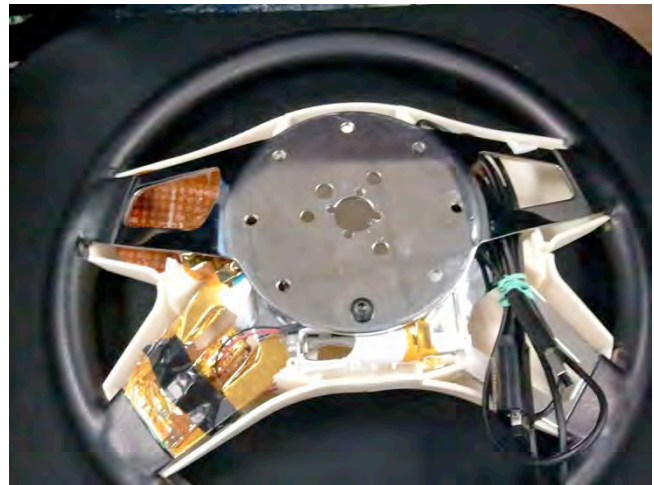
Assembled electronics and plastics on the steering wheel (rear view).
